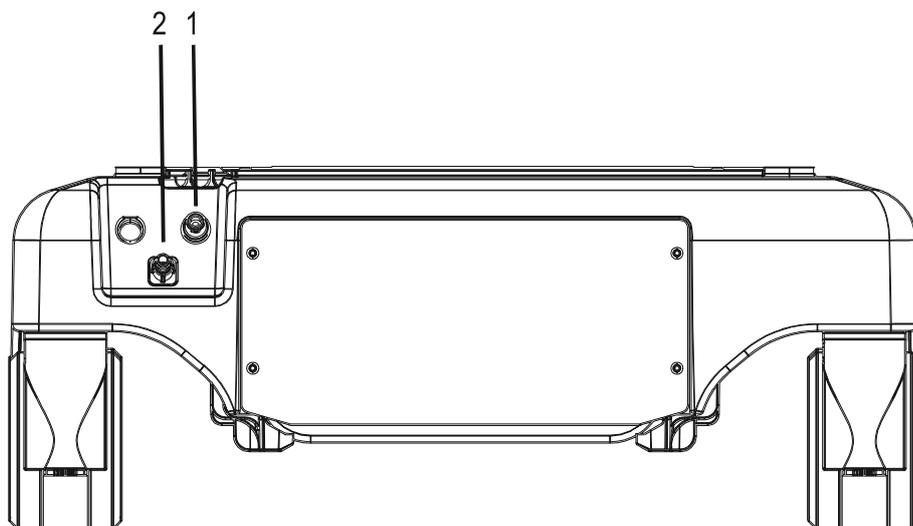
Base Platform, 4 Swivel Caster with Brake, Back View
